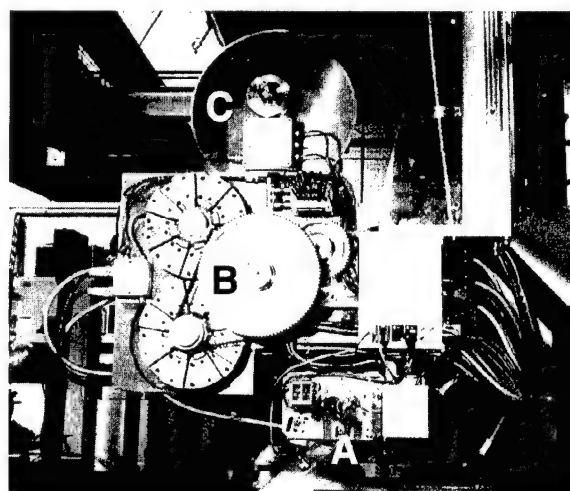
Photograph of the TFP machine head used in a motor factory in ABB. (A) Compaction roller assembly, (B) brake system and (C) prepreg tape spool.
